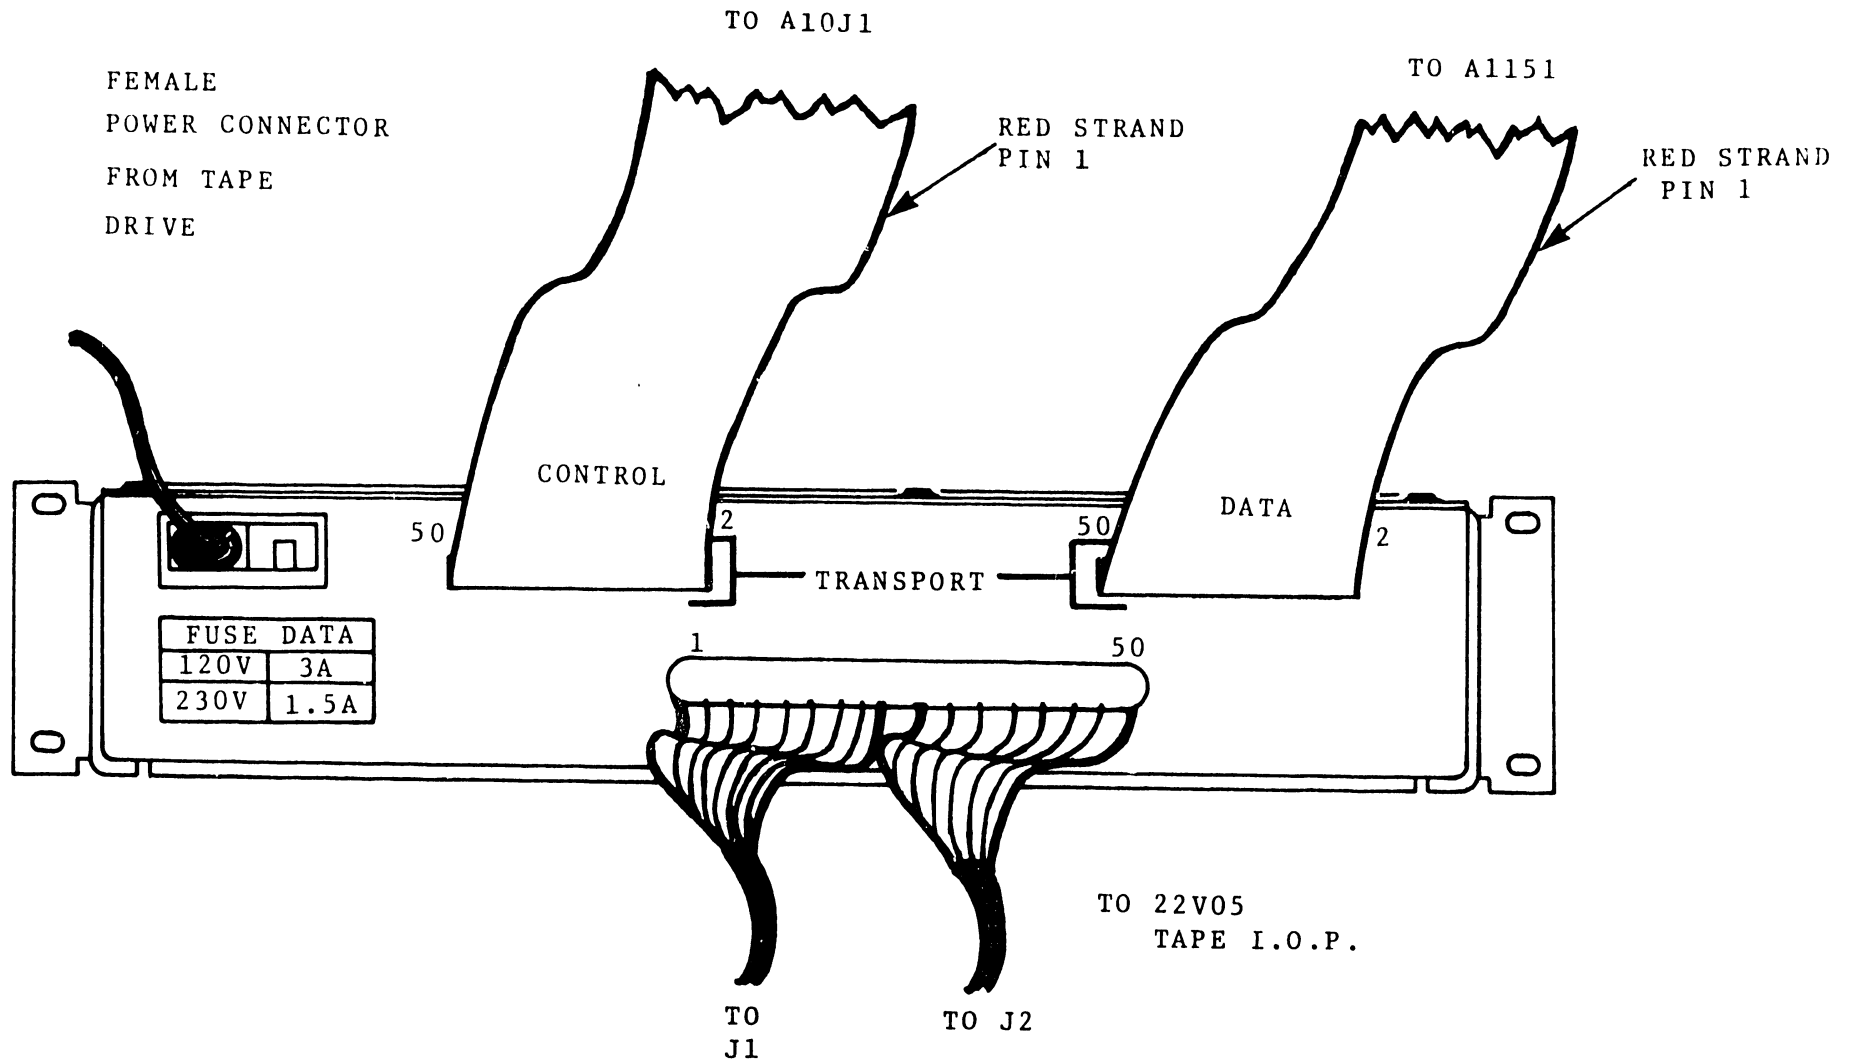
REAR VIEW OF FORMATTER ASSEMBLY
